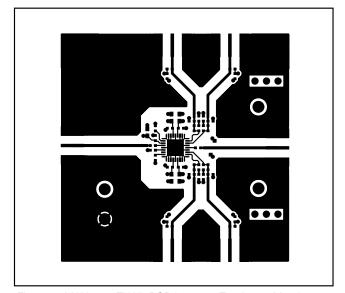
MAX2023 EV Kit PCB Layout—Top Layer Metal
